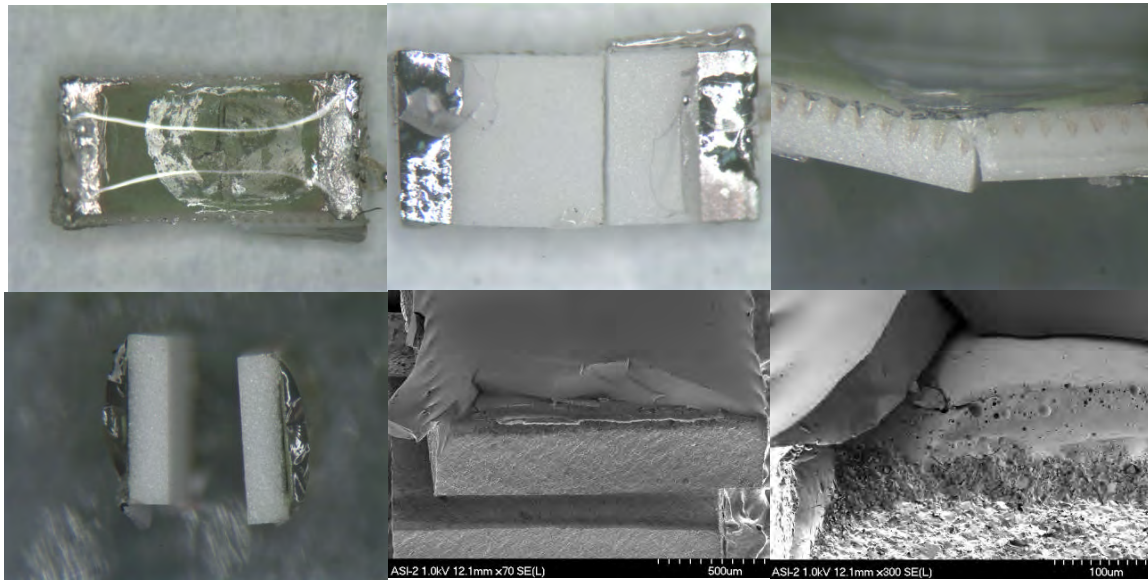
A broken, coated RM1206 thick film device. SEM analysis found no conformal coat material on the fracture surfaces.
